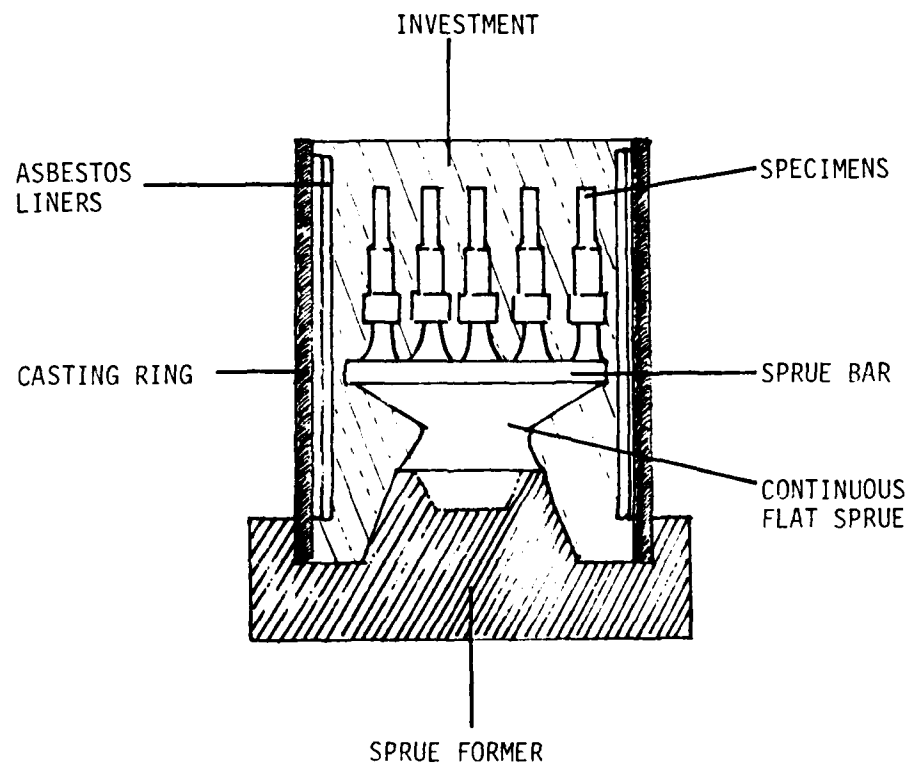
Cut Away Diagram of Casting Ring Showing the Position of the Specimen Patterns in the Ring Before Casting.
